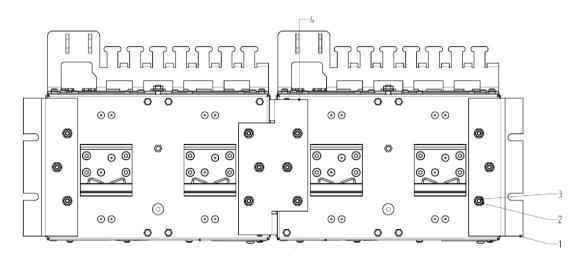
Rack mounting of two X-300EECs fastened together (view from below)
